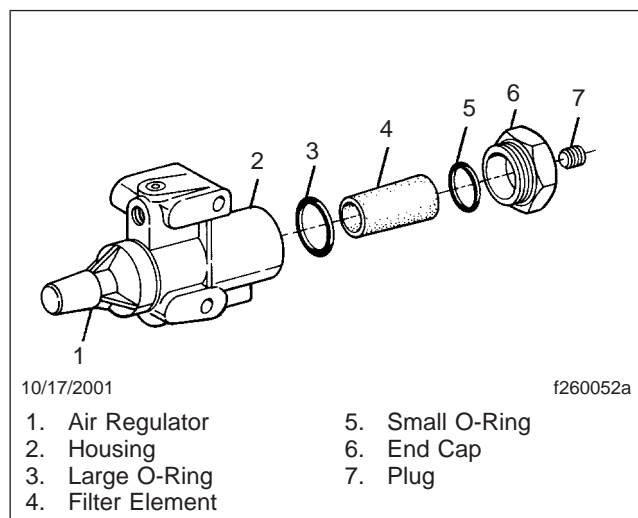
, Eaton Fuller Transmission Air Filter/ Regulator Components
